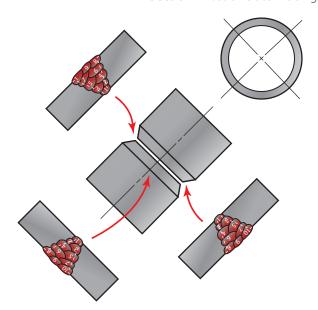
Welding bead sequence for 6G position.
